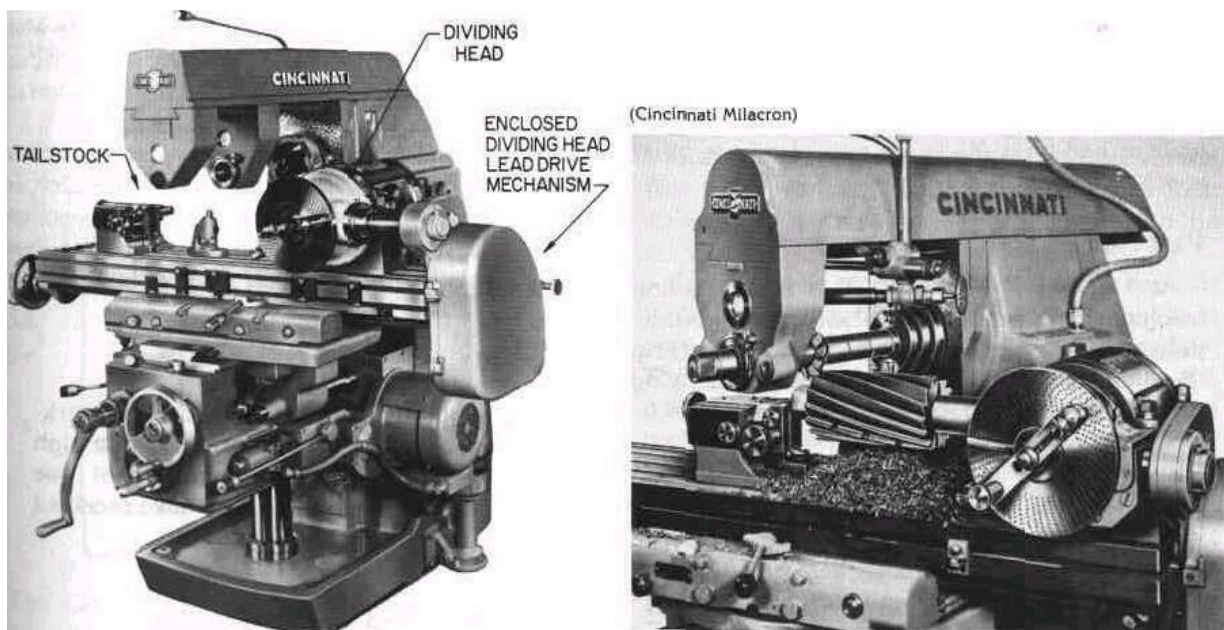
A universal horizontal milling machine equipped for helical milling. The close-up shows the workpiece mounted between the dividing head centers. A fluting cutter is mounted on the arbor.
